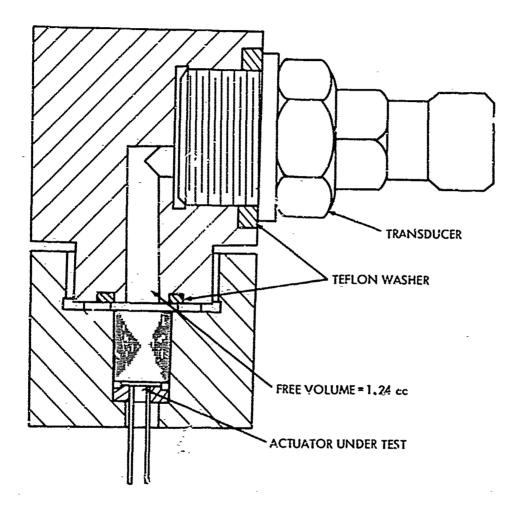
ASSEMBLY FOR PRESSURE BOMB TESTING
